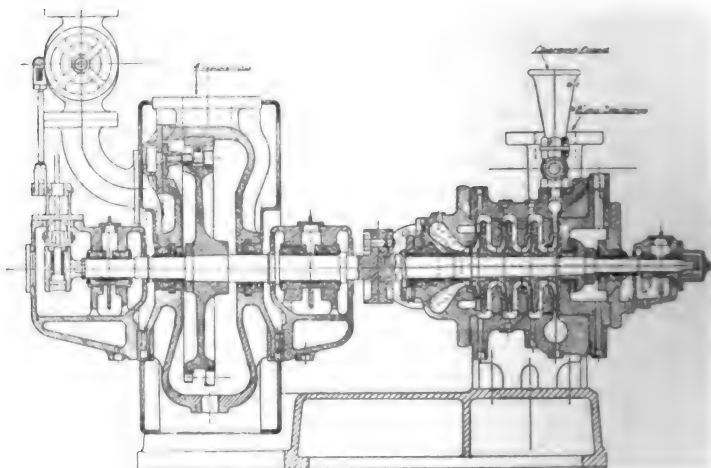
Turbine-driven Boiler Feed Pump. The British Westinghouse Company, 1911.
